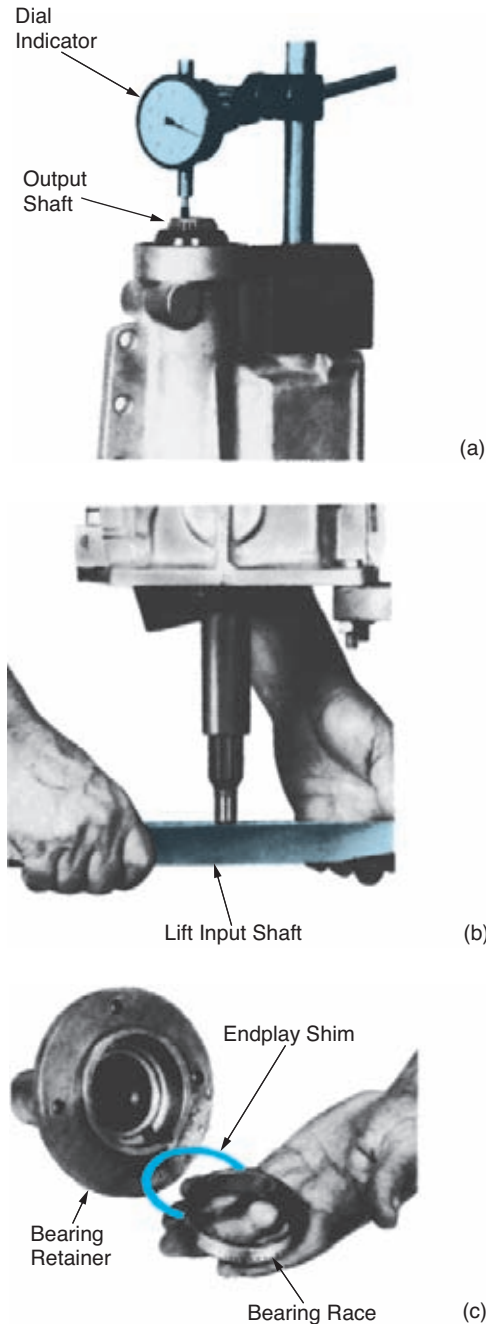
One method of selecting the proper shim to get the correct input/output shaft bearing preload on a T5 transmission is to assemble the transmission and mount and adjust a dial indicator at the output shaft (a) to read the end play as you lift the input shaft (b). Change the end play shim as needed to compensate for too much or too little end play (c). (Courtesy of Ford Motor Company)
